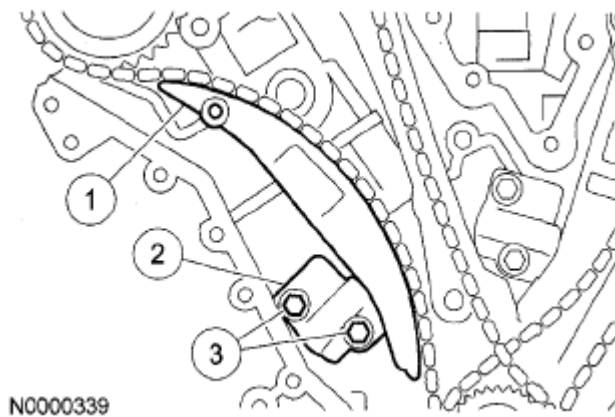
Identifying Tensioner Arm, Tensioner And Bolt
